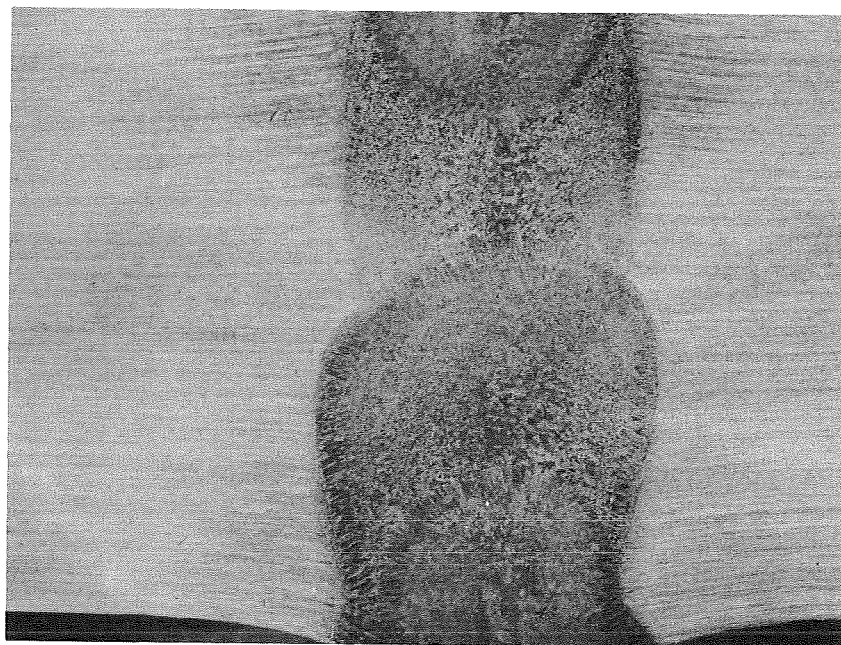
Macrosection of an X7007-T6 Welded Joint (Enlarged 3X)
